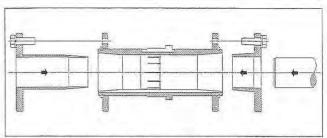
Short Shaft Bushing and Output Hub Assembly
